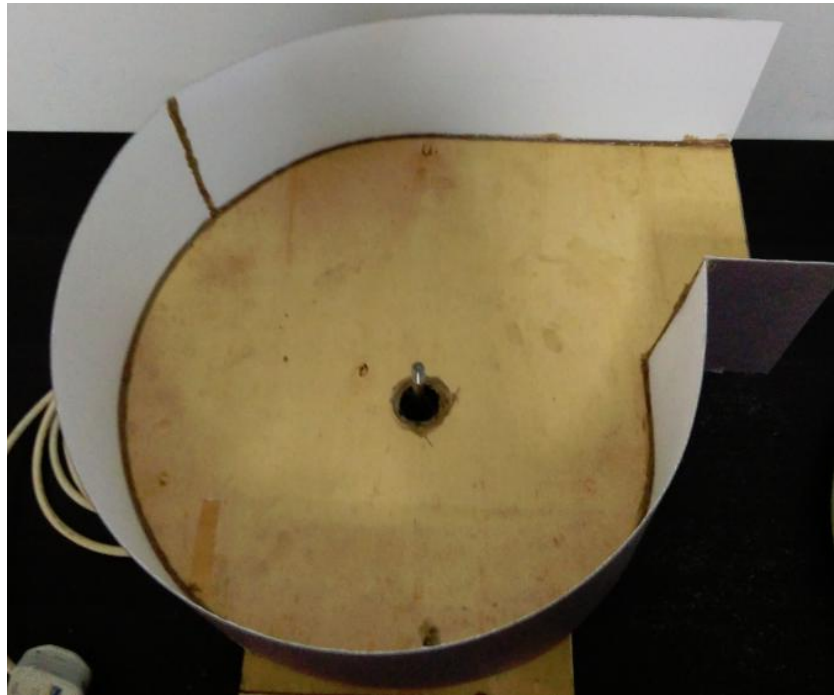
Casing/Housing of the Fabricated Centrifugal Exhaust Fan
